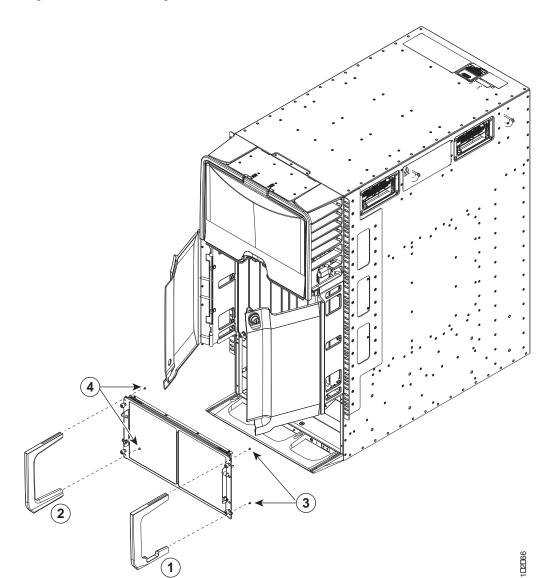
Attaching the Side Frame Assemblies to the EMI Panel
